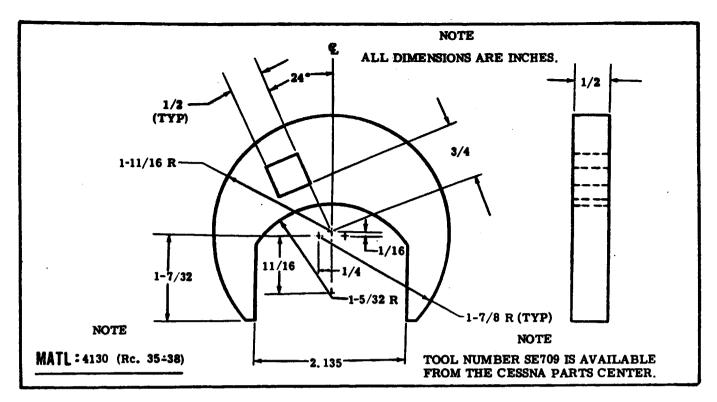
Oil Filter Adapter Wrench Fabrication
